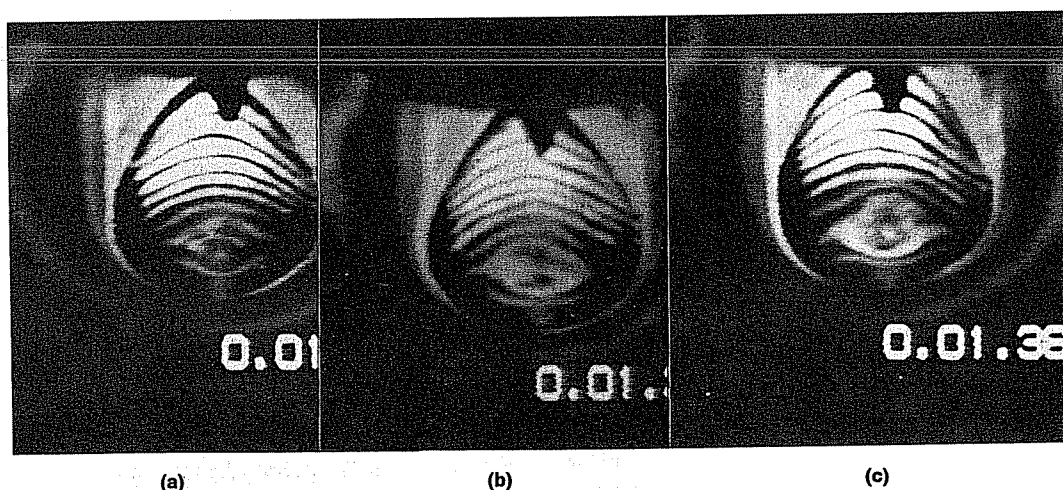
Images acquired by the proposed sensor: (a) current = 112 A, partial penetration; (b) current = 118 A, full penetration, back-side bead width 2.6 mm; (c) current 119 A, full penetration, back-side bead width 2.7 mm. GTA welding without filler, torch speed 2 mm/s, arc length 3.0 mm, 3 mm stainless steel, argon flowrate 7 l/min, back-side argon flowrate 2 l/min
